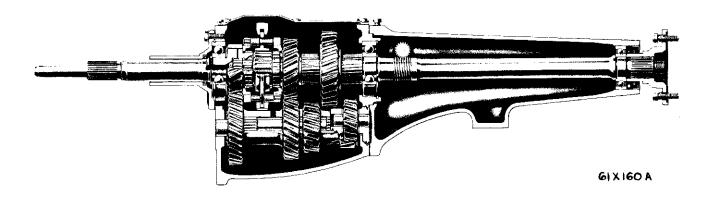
A-745 Three Speed Transmission (Sectional View)
